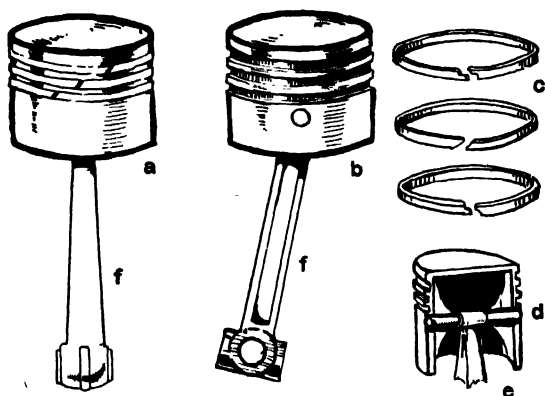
Piston, piston rings, wrist pin and connecting rod.
